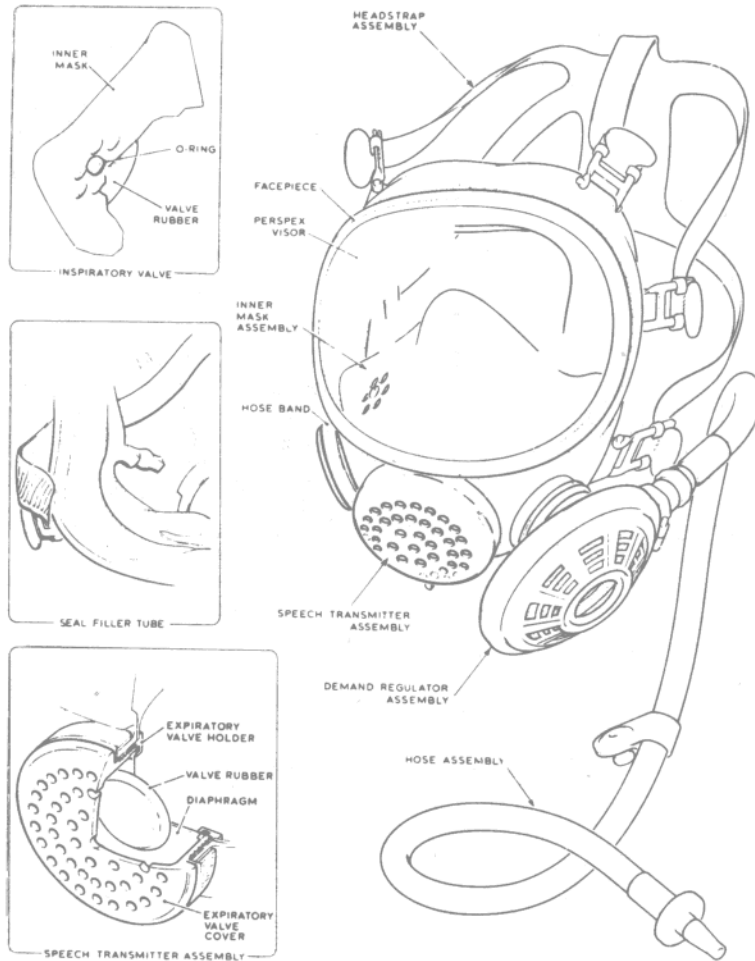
Mk 9 Set: Mask and Regulator Assembly.
